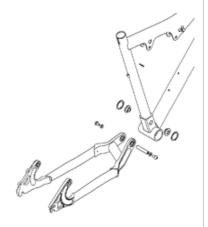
Chainstay (5) and ASR Front Triangle (1) with main bearings (7), button head bolts (19), and flat washers (12), exploded
